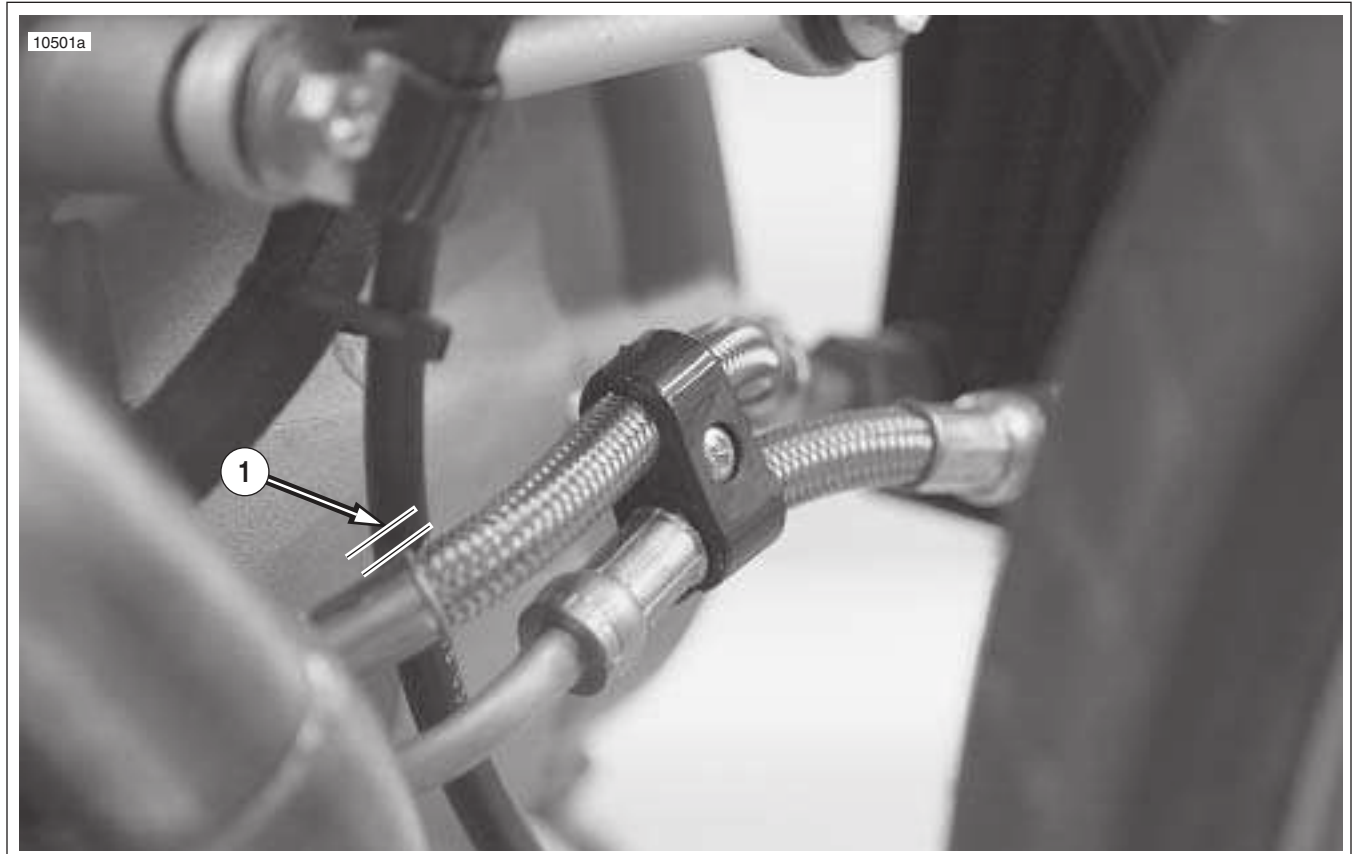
Oil Cooler Feed and Return Oil Line 1/8-1/4 in. (3.175-6.35 mm) Clearance
